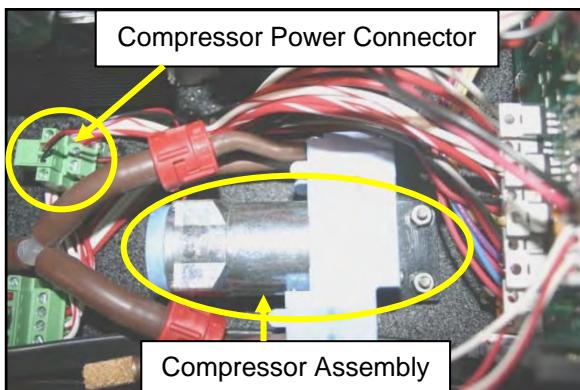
THE ADH NETCOM AUTOMATIC AIR DEHYDRATOR COMPRESSOR ASSEMBLY.
